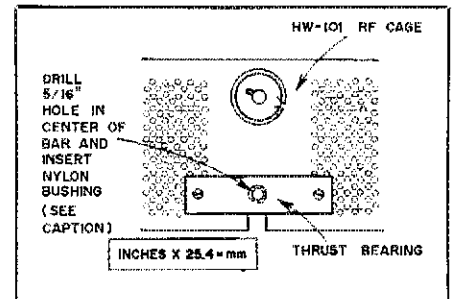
This thrust-bearing assembly reduces excessive wear on the loading-capacitor bearing in an HW-101. After placing the thrust-bearing assembly over the rotor shaft, mark mounting holes A and B to align with holes in the rear of the rf cage. Drill A and B with a 1/8-inch bit. Mount the assembly on the rf cage with no. 6 hardware.
